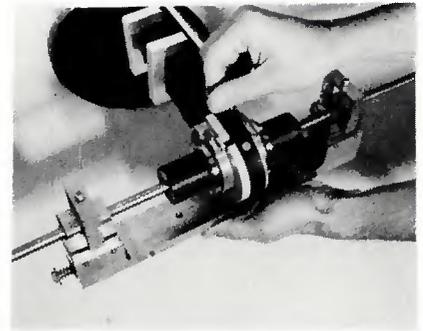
Orbiting-arc weld head with attached rubber sleeves for welding molybdenum tubing outside a glove box and with yoke-type fixture
